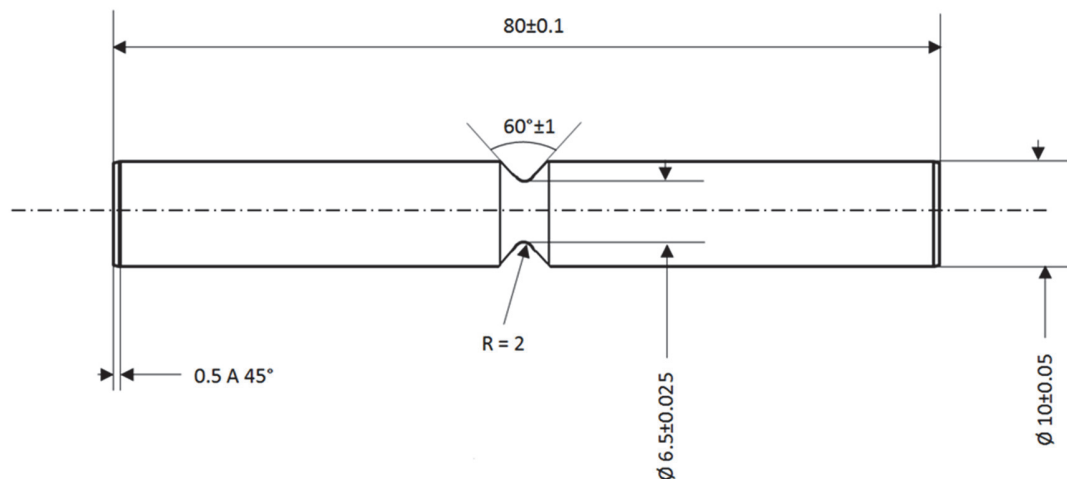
Geometry of notched cylindrical specimen for the rotating bending.
